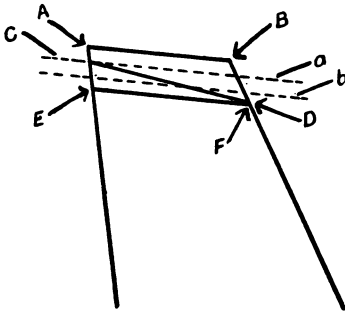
Diagram of Grinding Clearance on Teeth of Cutters.
